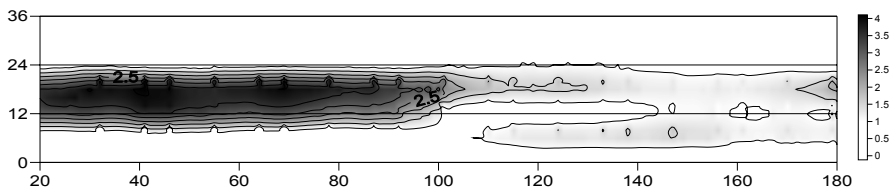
Magnetogram $m - H_{Lx}$ of joint P12, indications: 20 ÷ 110 mm – SCZ in the area of the weld seam coincides partly with the location of the occurrence of defects
